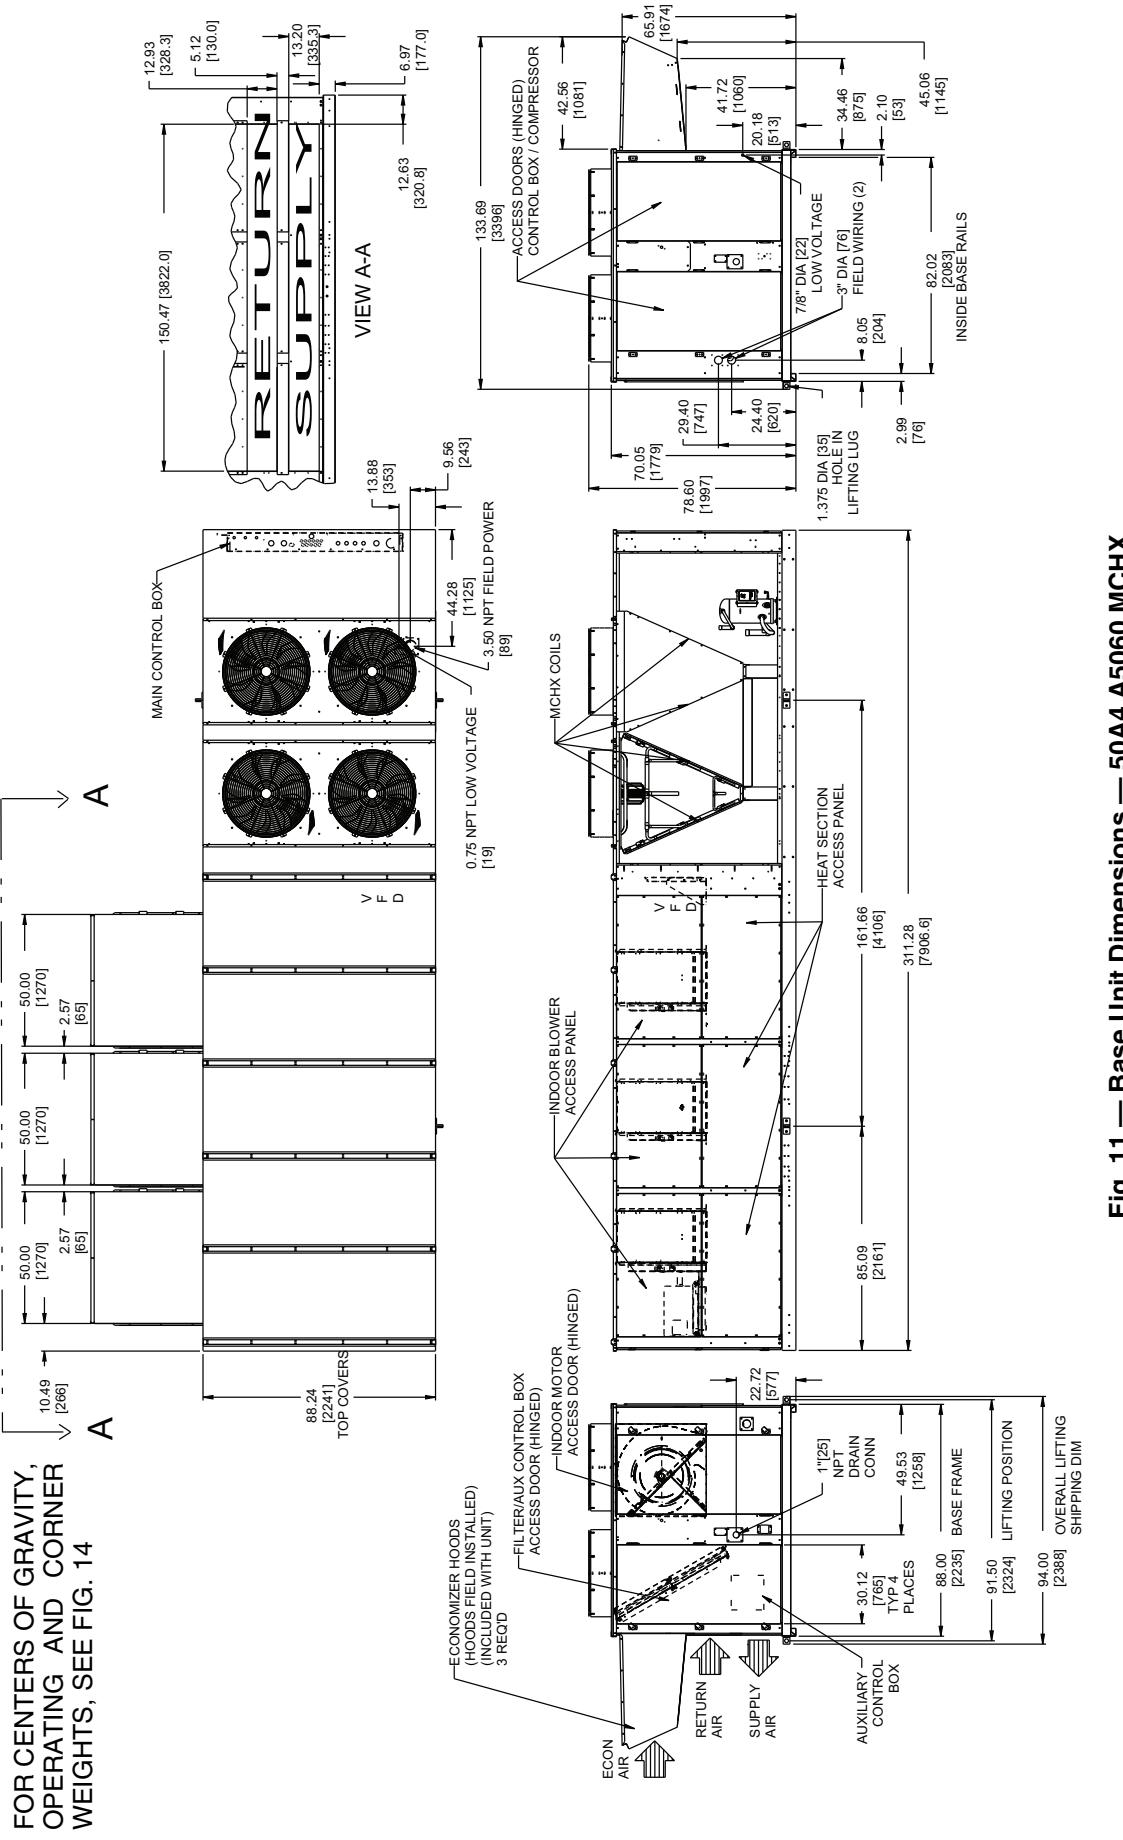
Base Unit Dimensions — 50A4,A5060 MCHX
